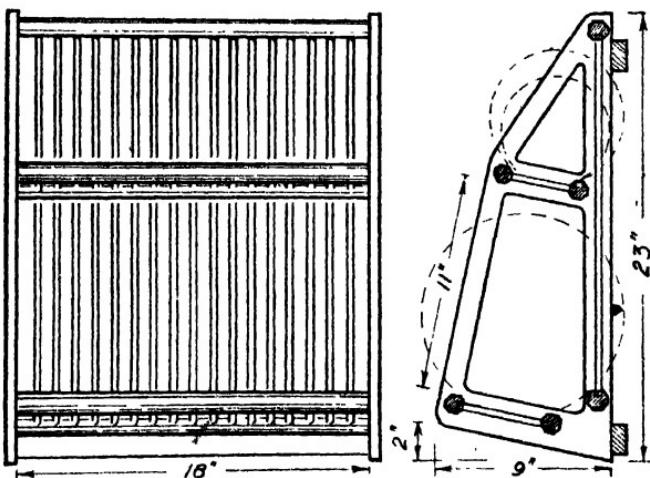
ELEVATIONS OF PLATE RACK, WITH SIZES.
